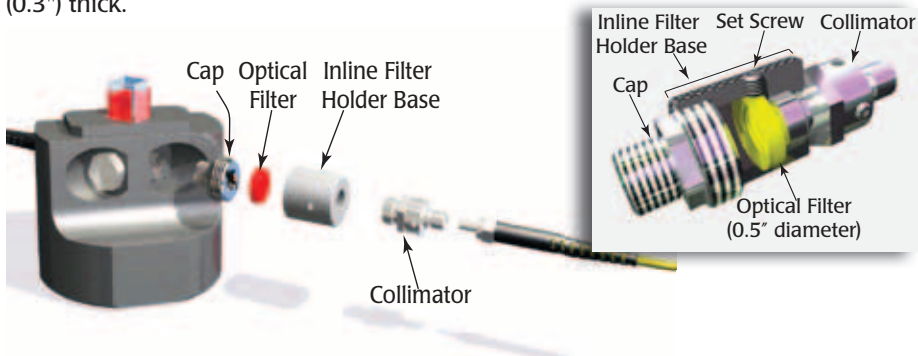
Exploded view showing the 4-way Cuvette holder with collimator and Inline Filter Holder Assembly in an absorbance configuration
